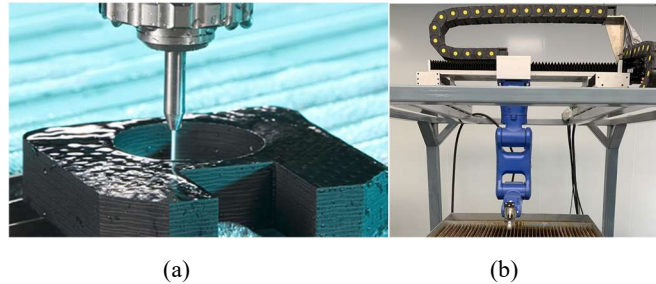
Equipment: (a) AWJ cutting, (b) AWJ eight axis machine
